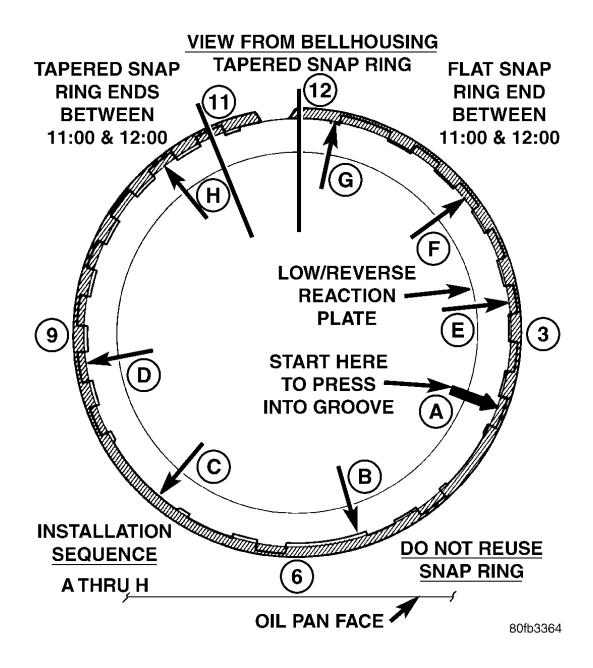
Proper Snap Ring Orientation Courtesy of CHRYSLER LLC
